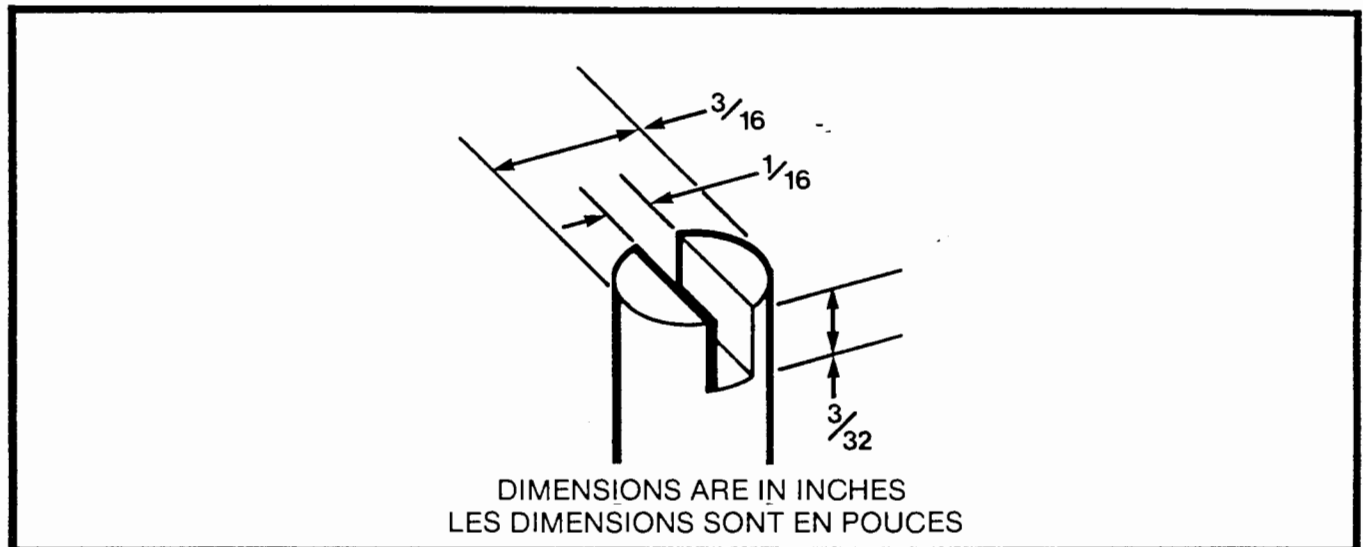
Front Sight Blade Securing Screw Removal Tool
